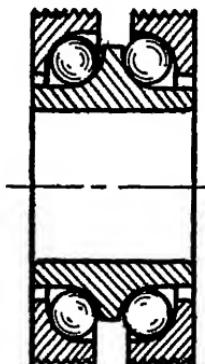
THIS BEARING TAKES THRUST IN BOTH DIRECTIONS
